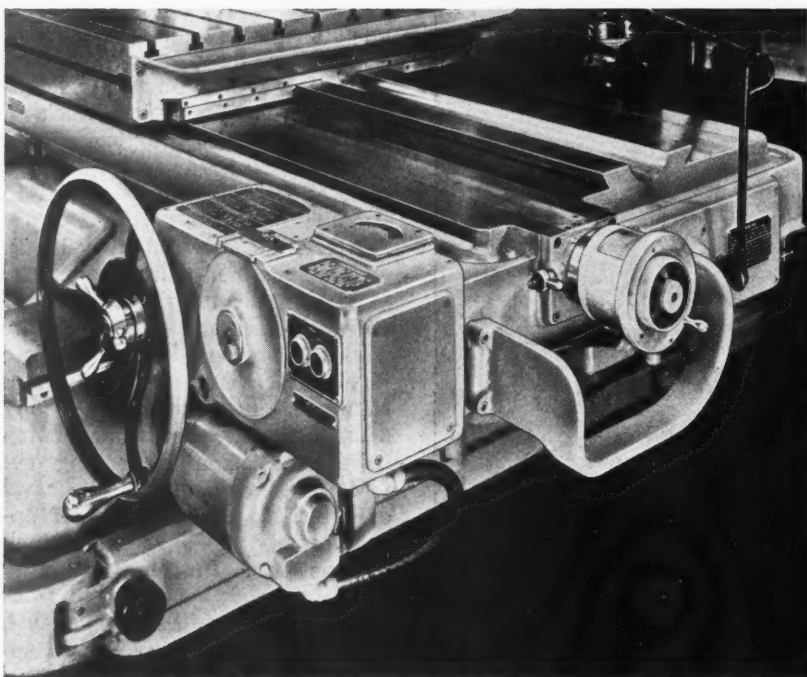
"Electrolimit" measuring equipment for precision locating of table and work now available on Pratt & Whitney jig borer
